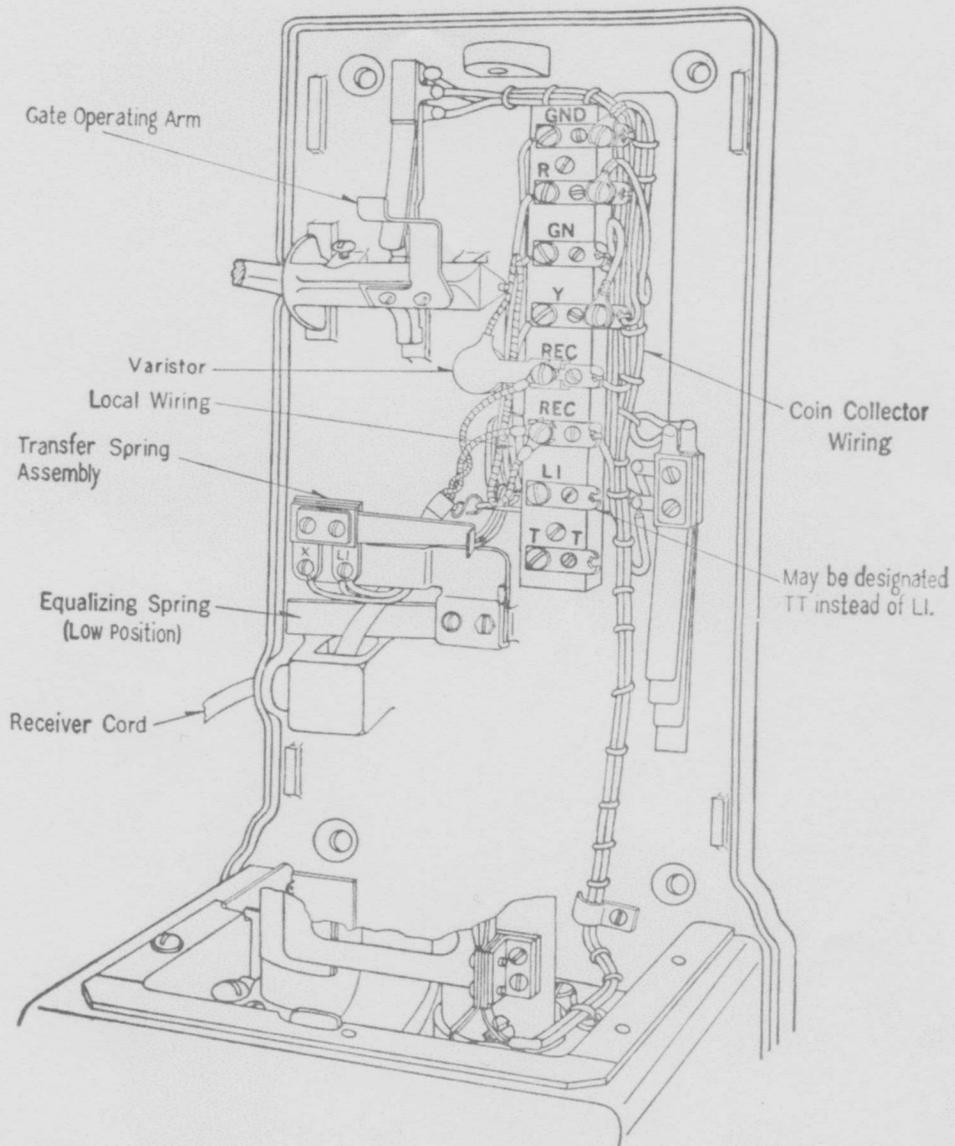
55-type Coin Collector—Lower Housing and Backplate Assembly
